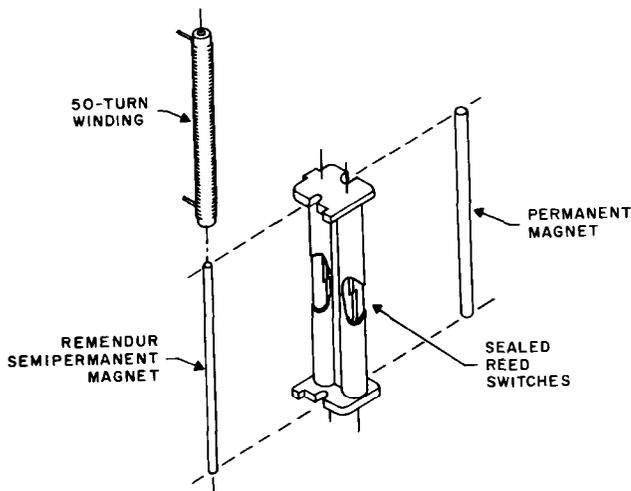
Bipolar Ferreed Switch (Exploded View)
